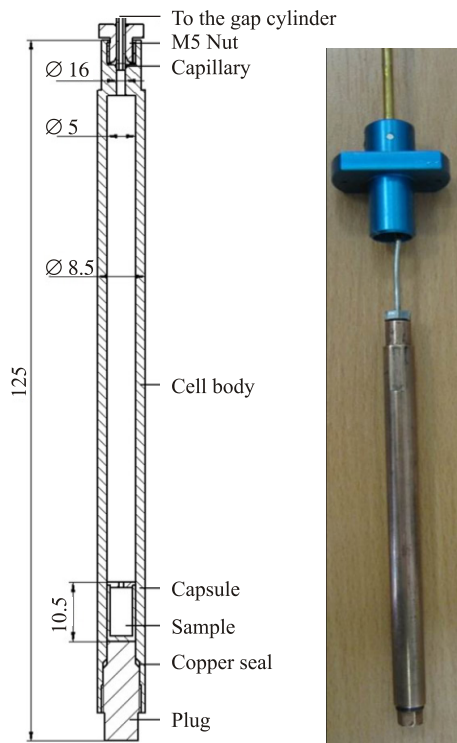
(a) Drawing of the cell with key dimensions; (b) picture of the assembled pressure cell (unpublished).
